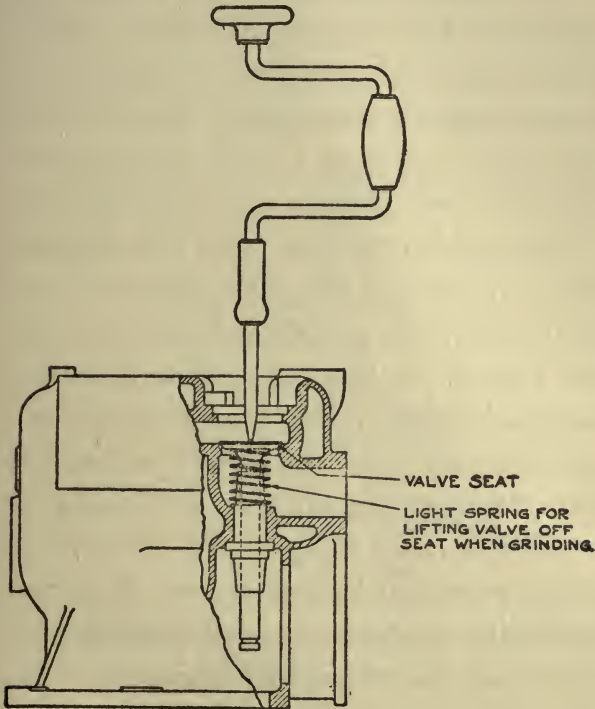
GRINDING VALVE IN ENGINE WITH FIXED HEAD
